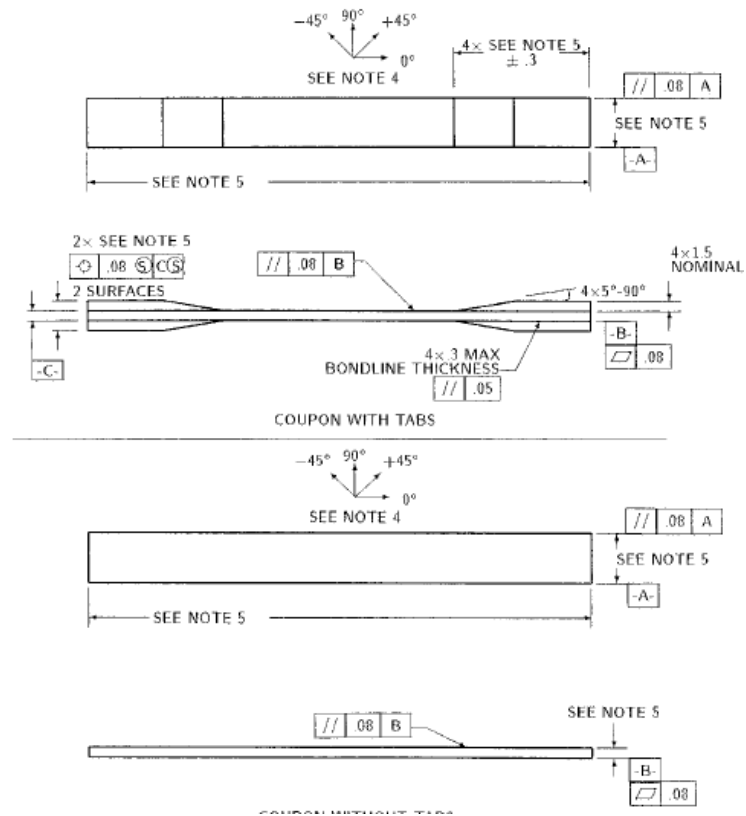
Dimensional tolerances for tension specimens [70].
